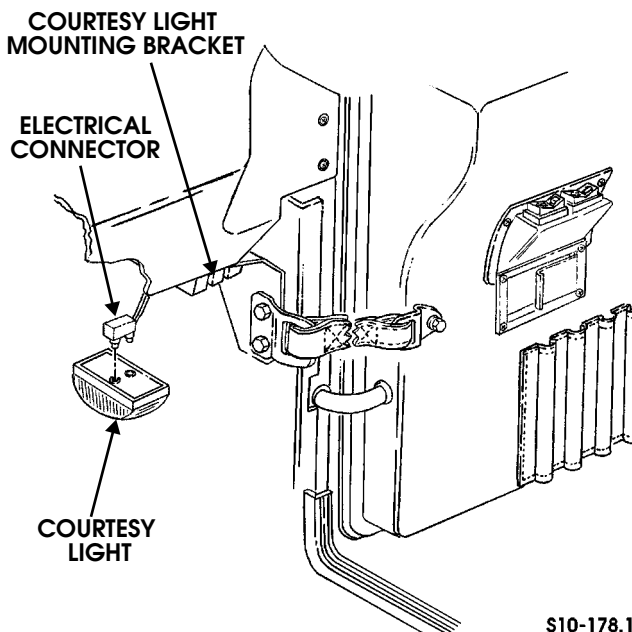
Front Passenger Side Courtesy Light Replacement
